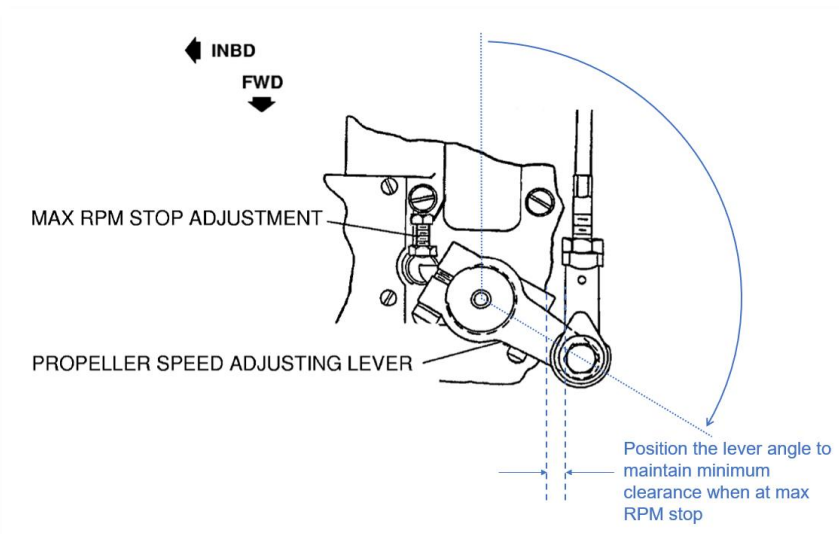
Top view drawing indicative of governor and cable rod end assembly.
